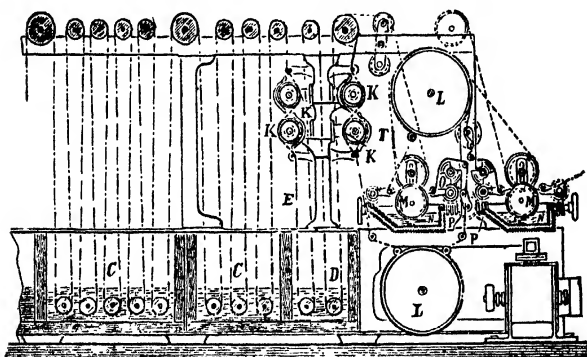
Machine for Impregnating Fabrics with Waterproofing Liquor (Miller & Son).
